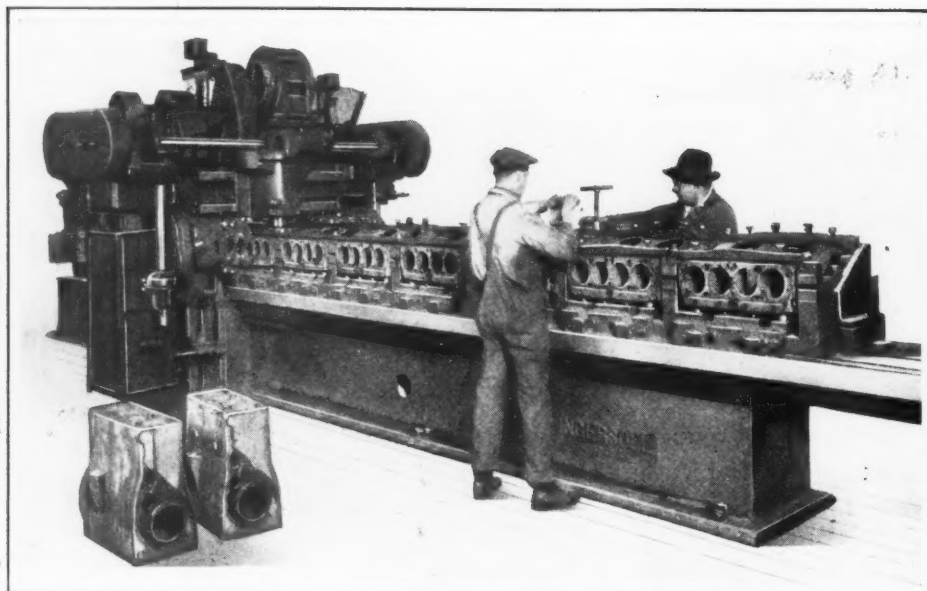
Rough- and finish-milling the Top, Bottom, and One Side of Seven Cylinder Blocks at One Time
